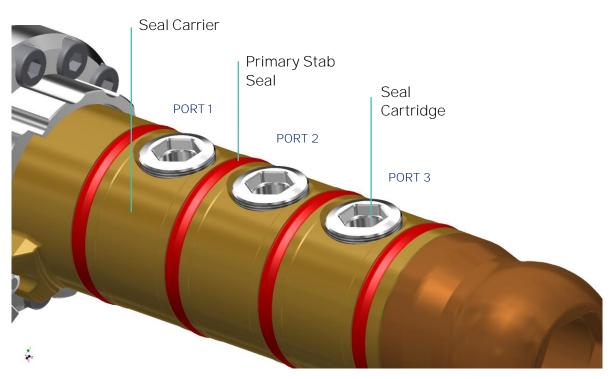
Seal Carrier and Seal Cartridges typical Valve Stab design
